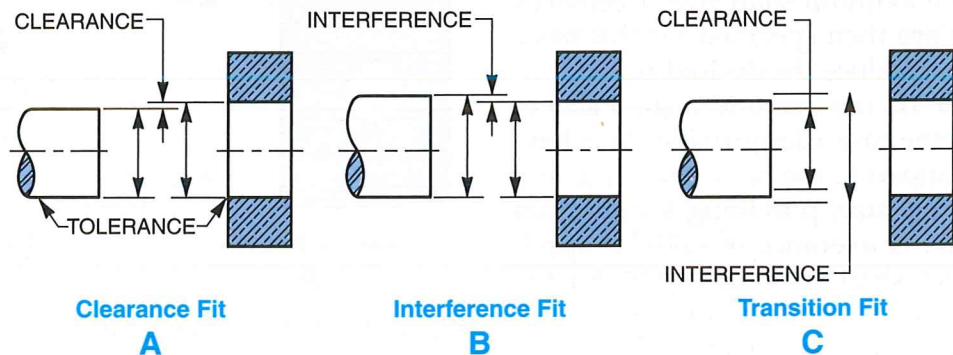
Types of fit used in the design of parts. A—A clearance fit is one where a gap, or air space, occurs between two mating parts. B—An interference fit occurs when the part being inserted is larger than the opening that it is being inserted into. C—A transition fit occurs when the dimensions and tolerances are specified so that the mating parts might fit as an interference fit or a clearance fit, depending on how the two fit in the tolerance range.
